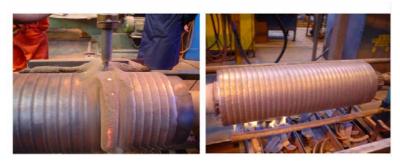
Procedure 1 – Single welding head 3.2 mm
